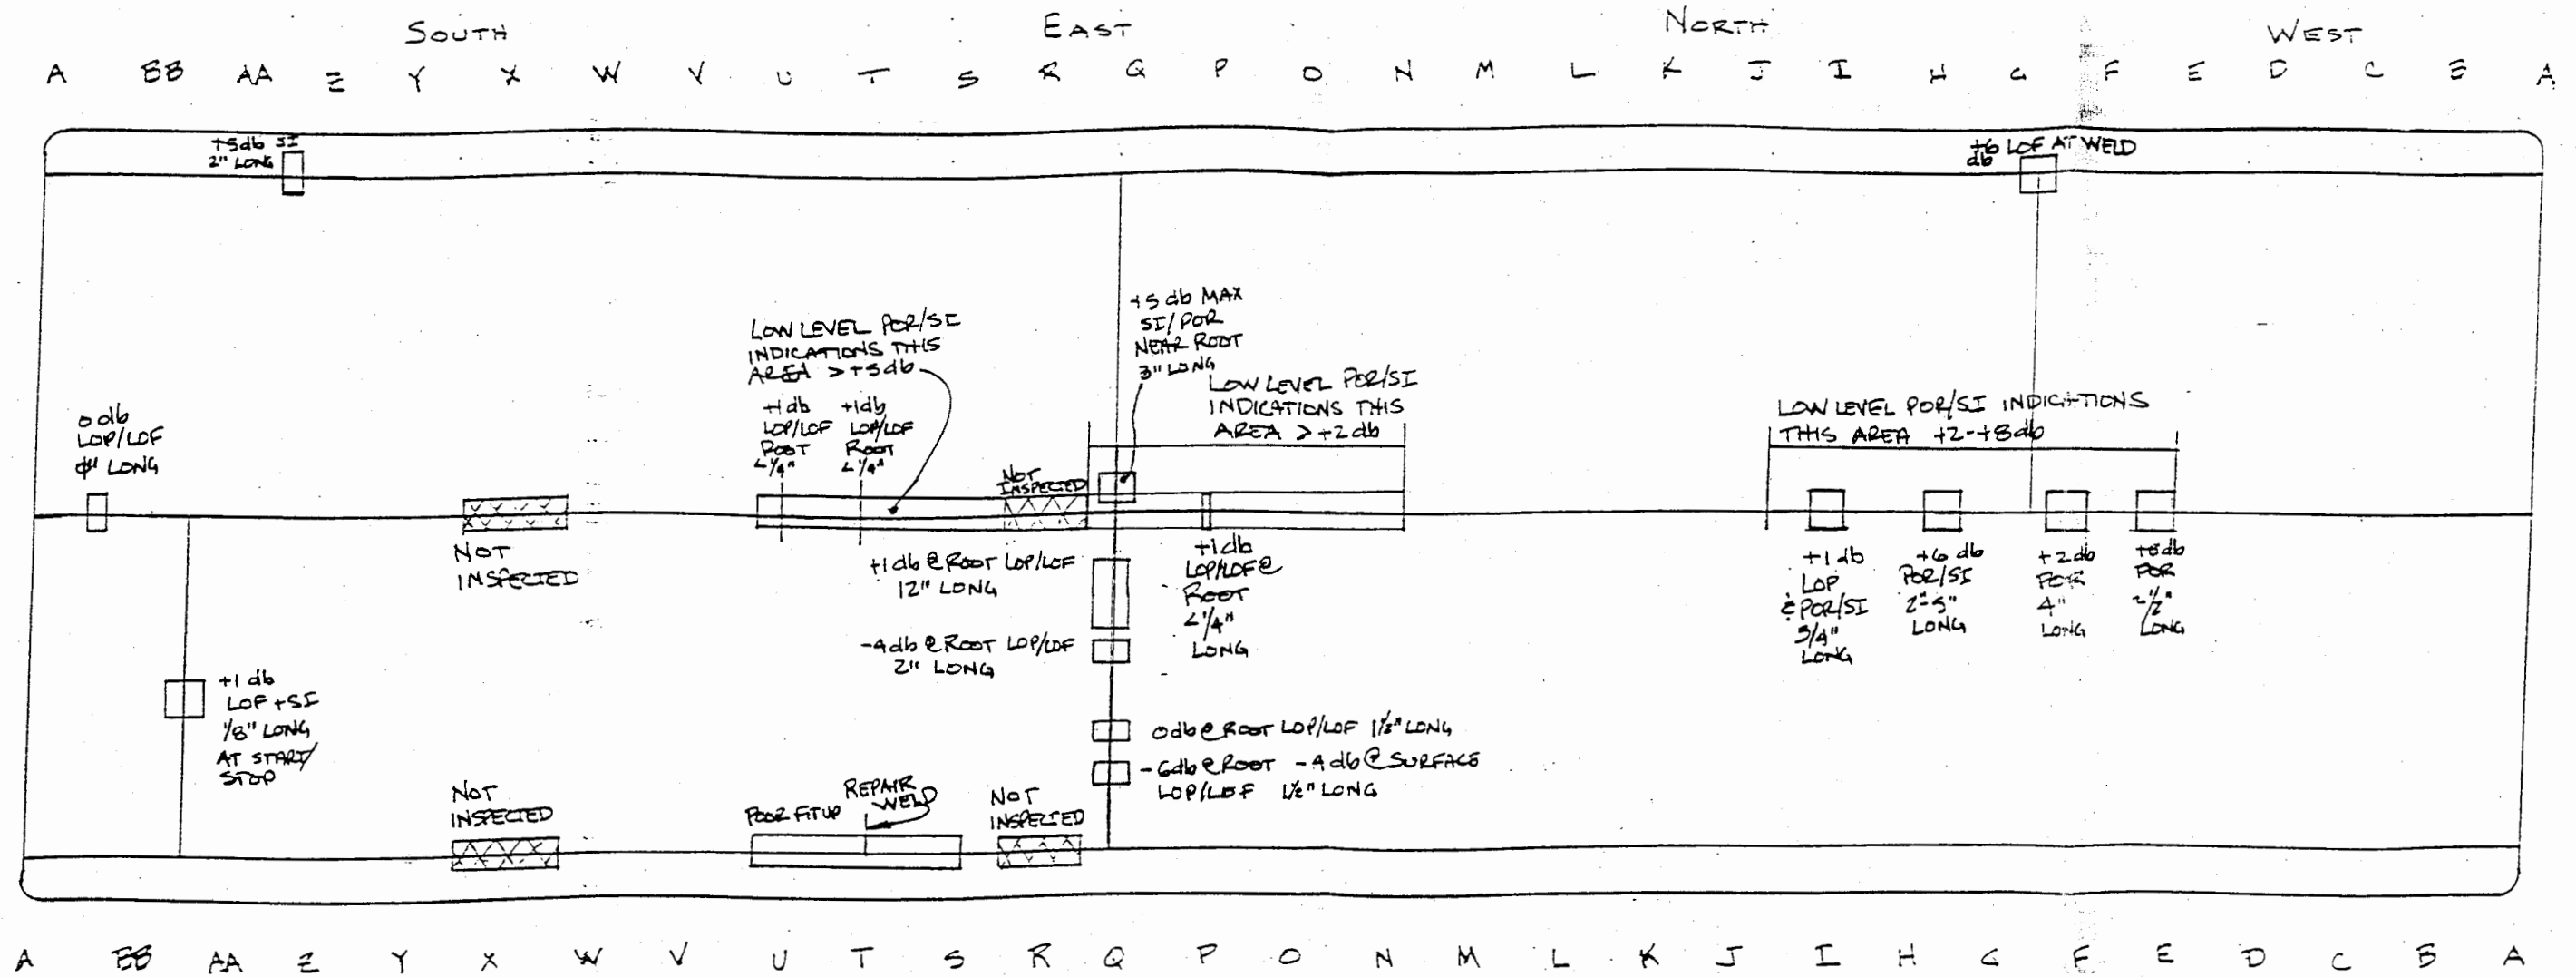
Map of Weld Defect Indications on Tank Shell
